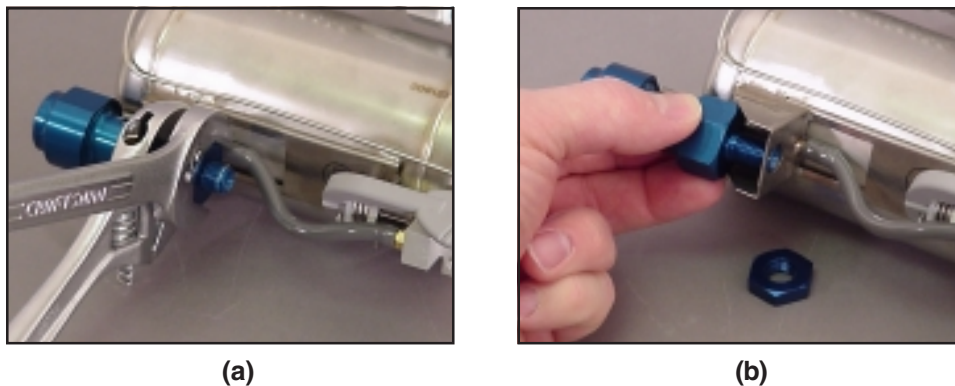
Removing Fill Tube Upper Compression Nut
